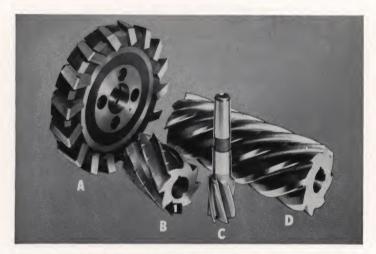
(A) Inserted-tooth face milling cutter; (B) Spiral nicked-tooth plain milling cutter; (C) End mill for milling aluminum; and (D) Helical milling cutter.
